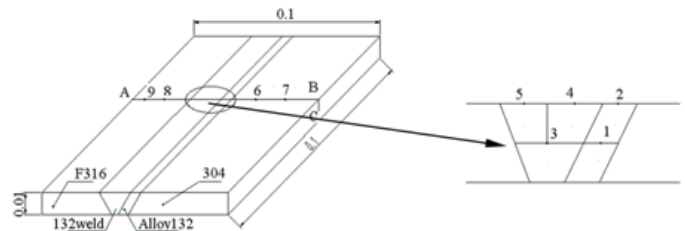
Diagrammatic sketch of multi-pass dissimilar metal welded plate.
